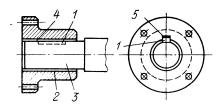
Position of key in the shaft and half-coupling keyway
